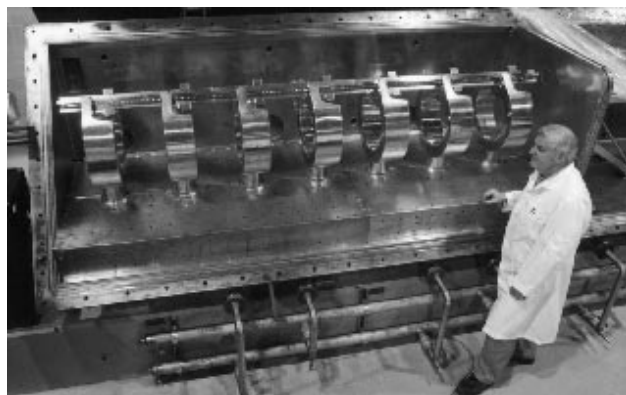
Seven rings assembled, installed and aligned in the bottom section of the vacuum tank
